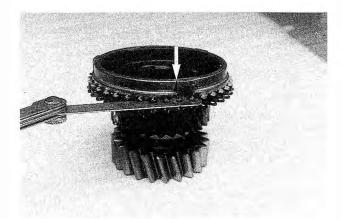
Synchronizer ring being checked for wear using feeler gauge. Measure in the area of the tabs (arrow).
